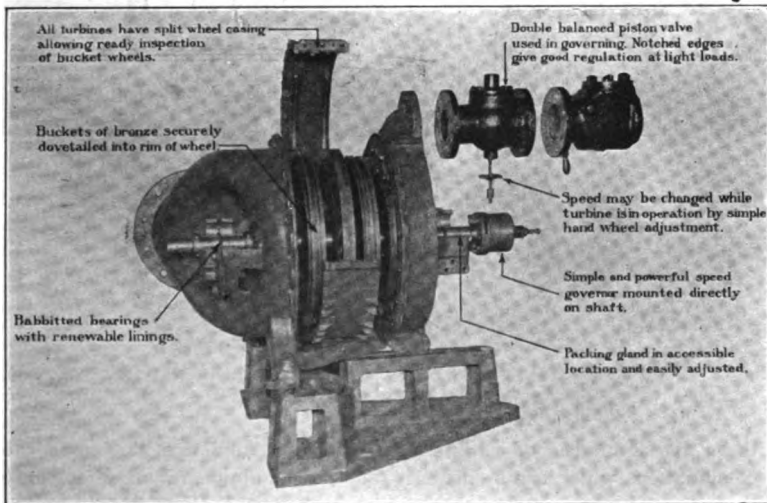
GENERAL ELECTRIC L TURBINE PARTIALLY DIS-ASSEMBLED
